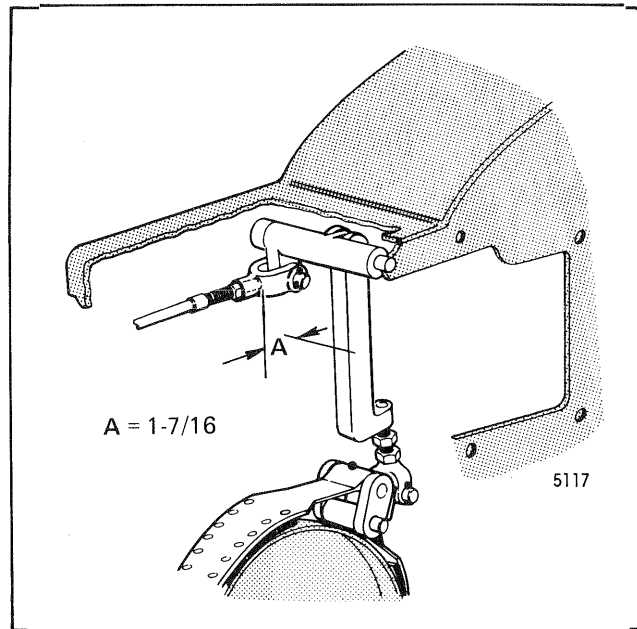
ADJUSTMENT OF BRAKE LINKAGE, DIRECT DRIVE WINCH
